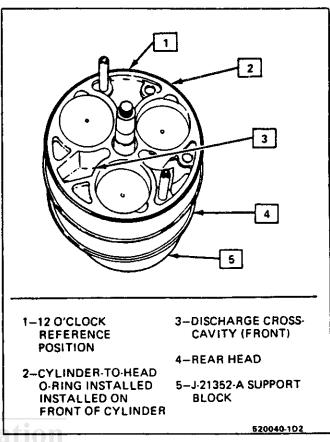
Cylinder and Shaft Assembly Installed Over Guide Pins into Rear Head
